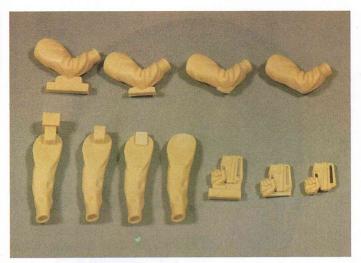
A layout of some different figure parts, showing the subsequent removal of the secondary and primary carrier. The final part has been cleaned thoroughly with Scotch Brite.
